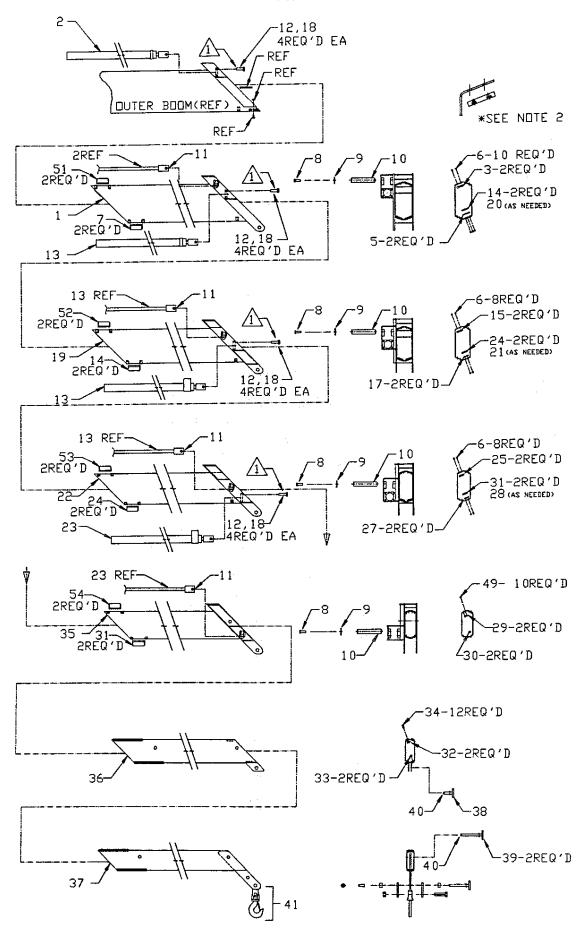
A. EXTENSION BOOM ASSEMBLY - 4H/2M (41710031)
